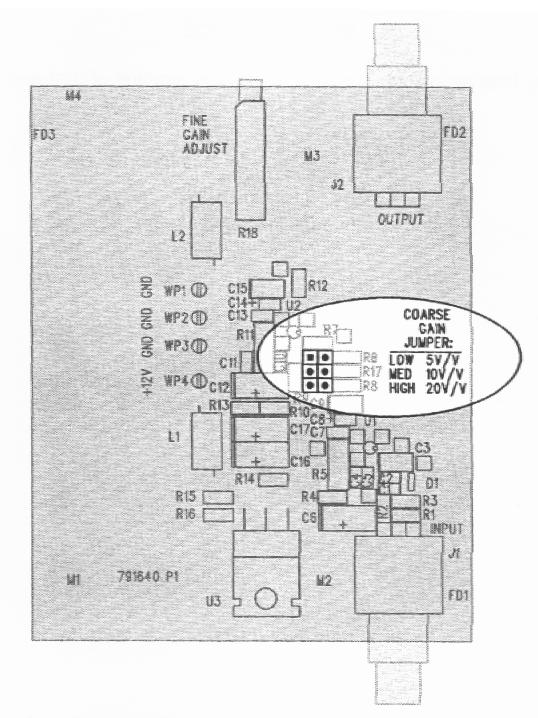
Setting the Model 9326 Coarse Gain Jumper. (Note that the jumper values are printed on the board.)
